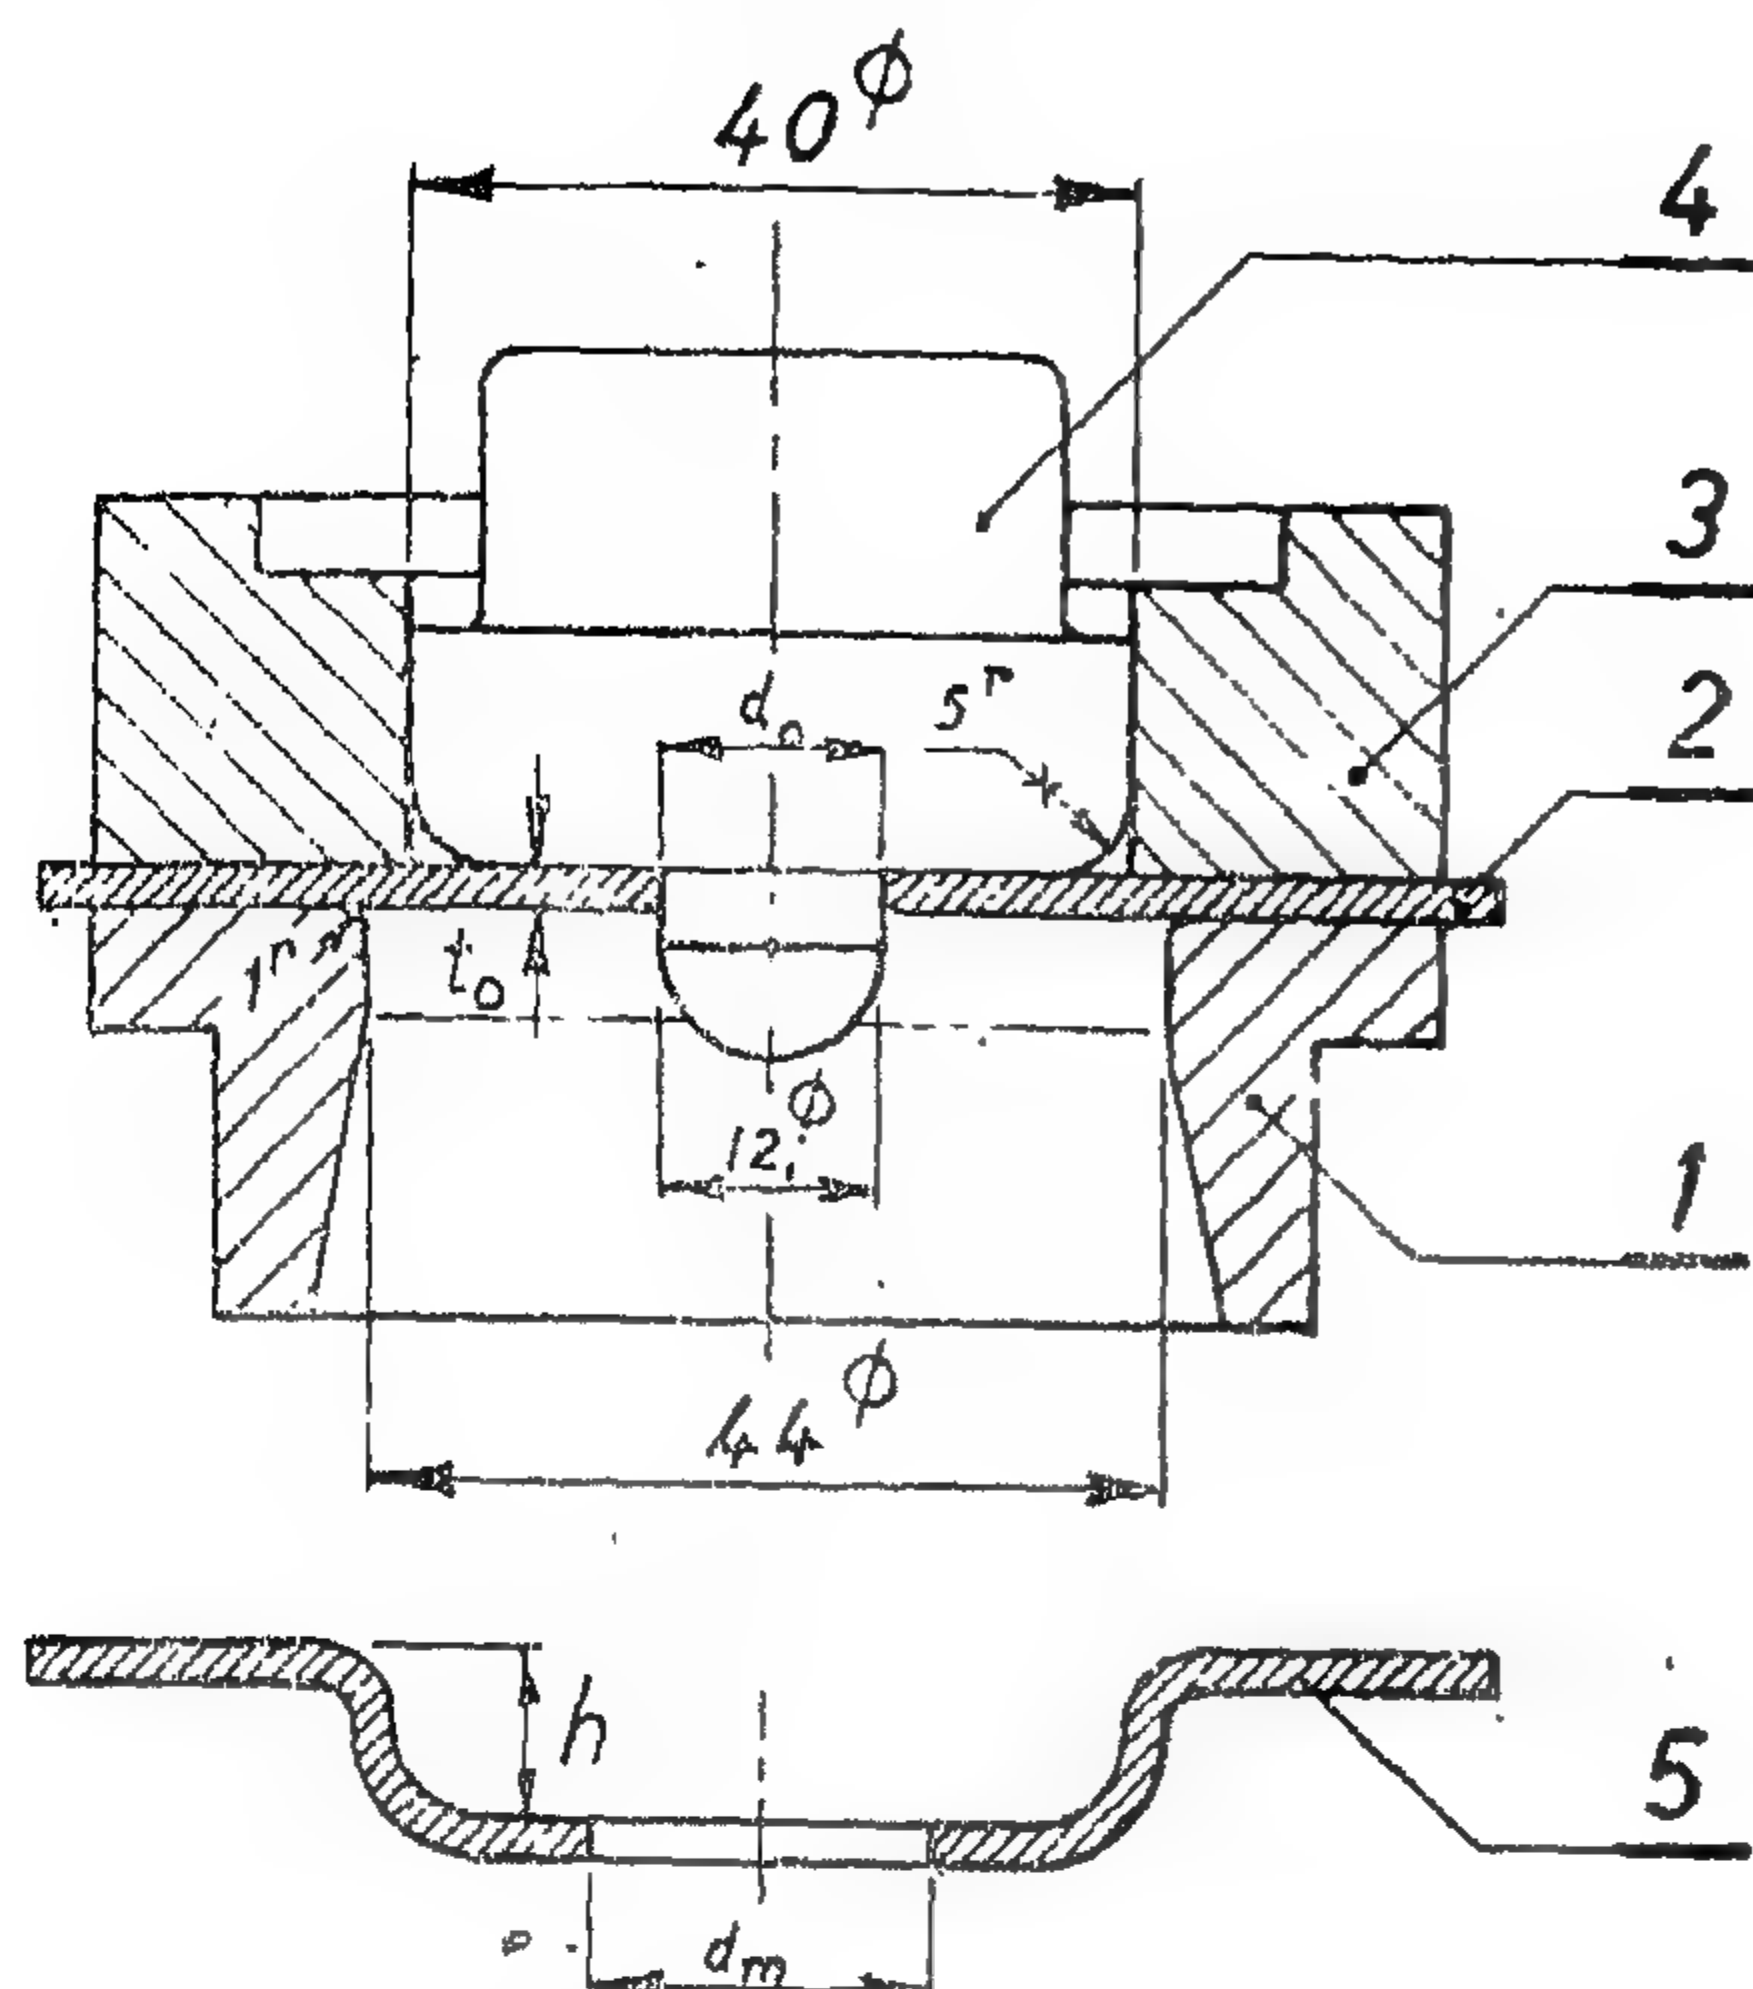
Details of tools used in performing the K.W.I. expanding test.
